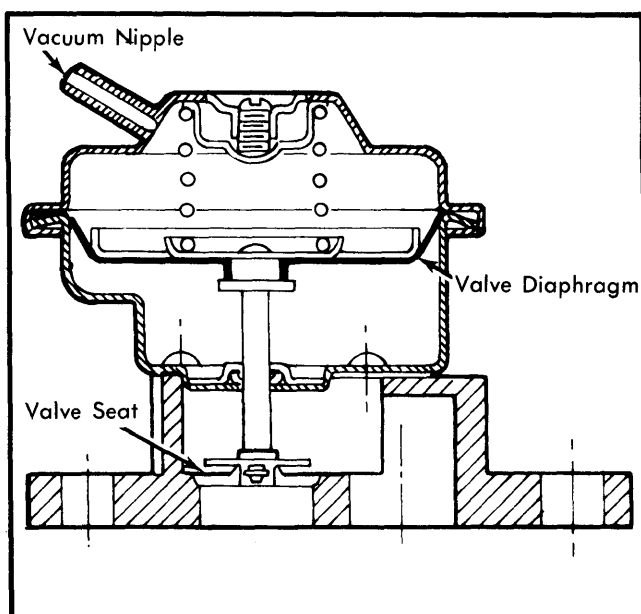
Sectional View of Typical EGR Valve without Backpressure Transducer
